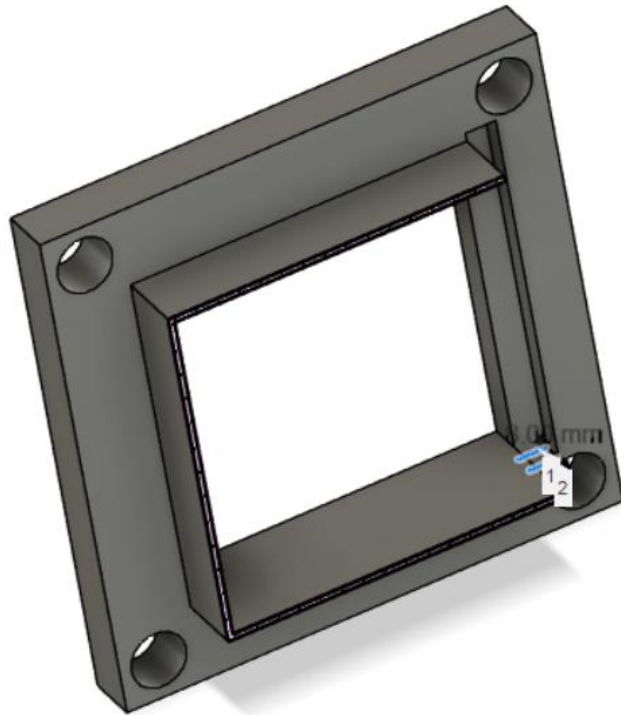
Section view of measurement wall locking space. 8 mm distance between blue lines 1 & 2
